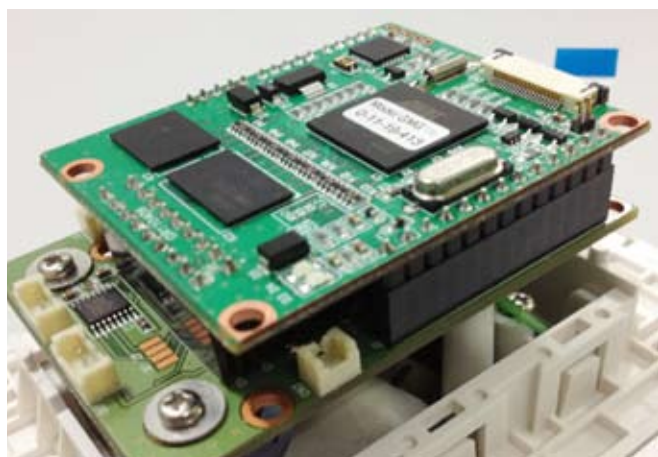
carefully press the module over the Auxiliary Board. The figure shows the Module coupled to the Auxiliary Board.
